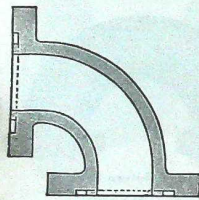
Steel Flanged Elbow with Grooved Flanges
